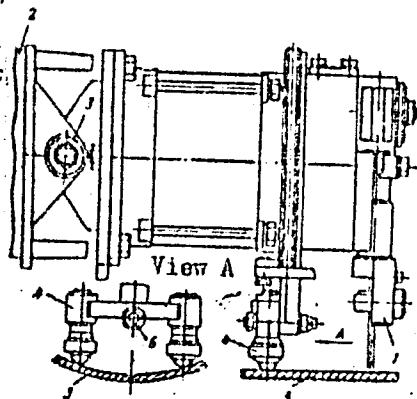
1 - welding head; 2 - arm; 3 - arm
